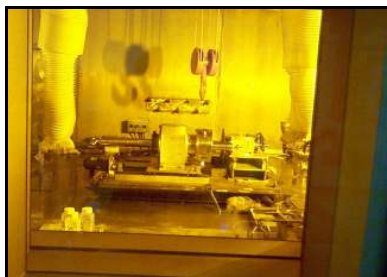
Capsule cutting machine installed in M2 Hot cell.
